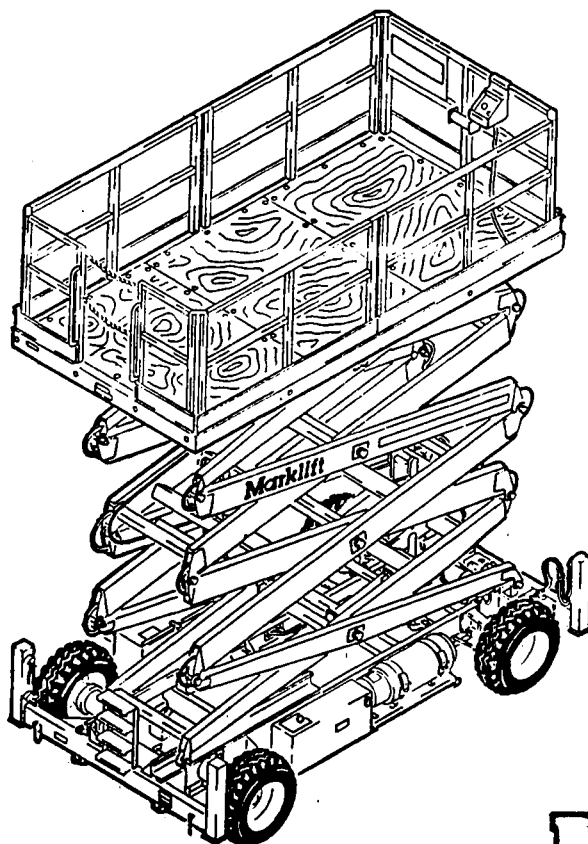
A	DECK ASSEMBLY (BEF. JUL. '86)
